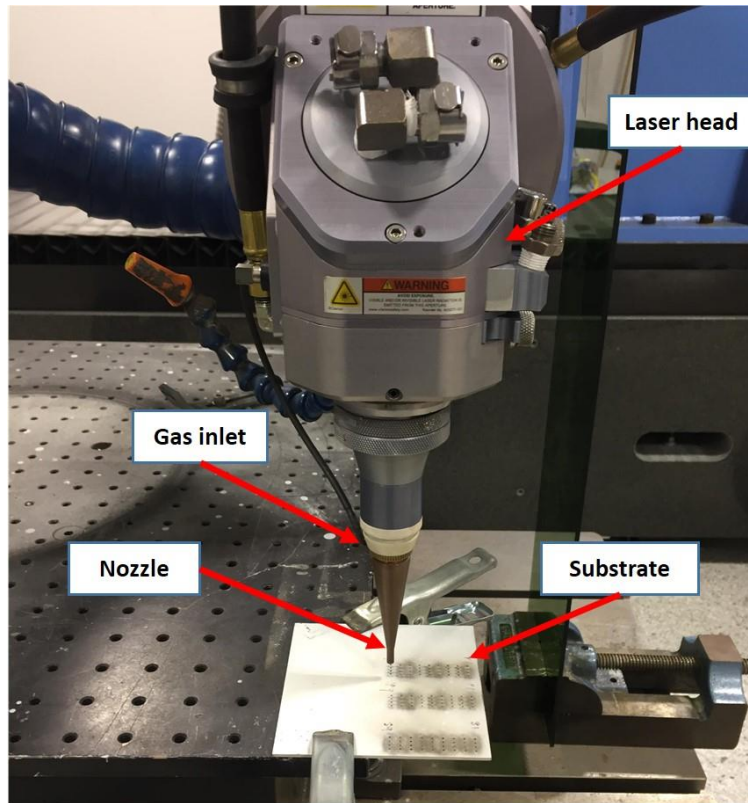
Laser drilling experimental setup (QCW fibre laser)
